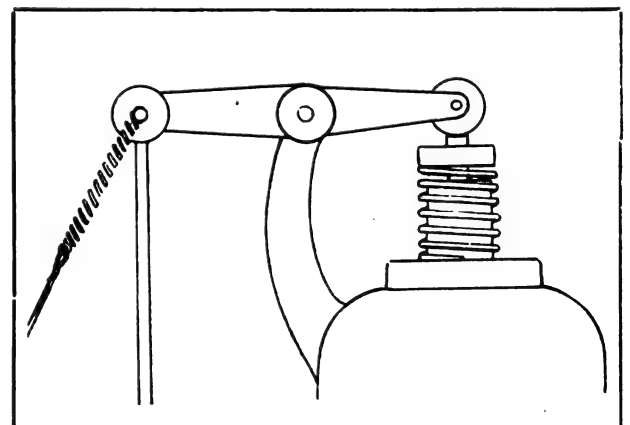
Silencing Overhead Valve by Applying Tension to Rocker Arm.
